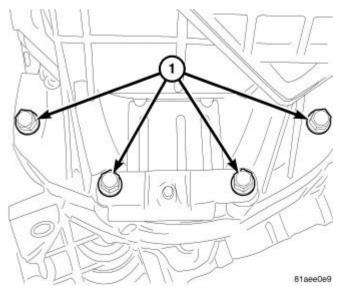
Oil Pan Bell Housing Bolts Courtesy of CHRYSLER LLC
